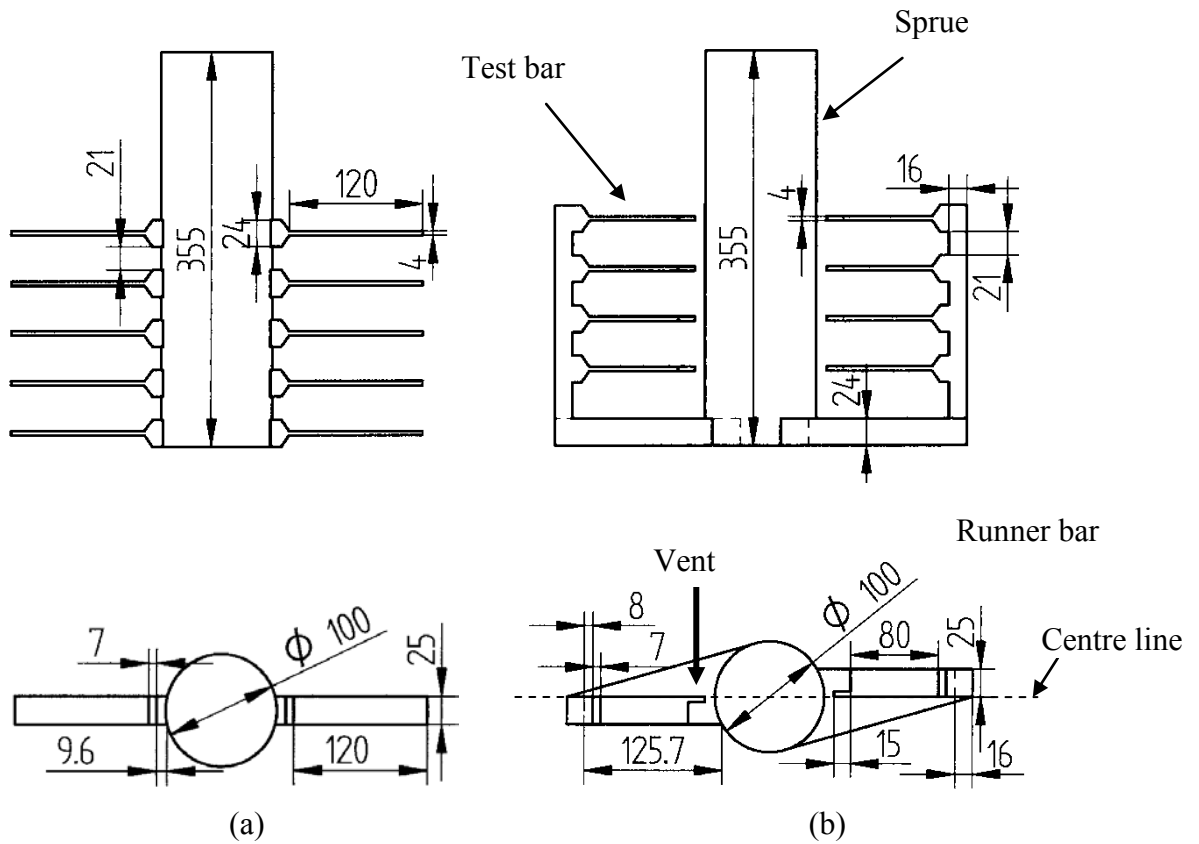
1. Side and plan views of (a) direct and (b) indirect gating mould designs used for producing centrifugally cast aluminium test bars; all dimensions in mm.
